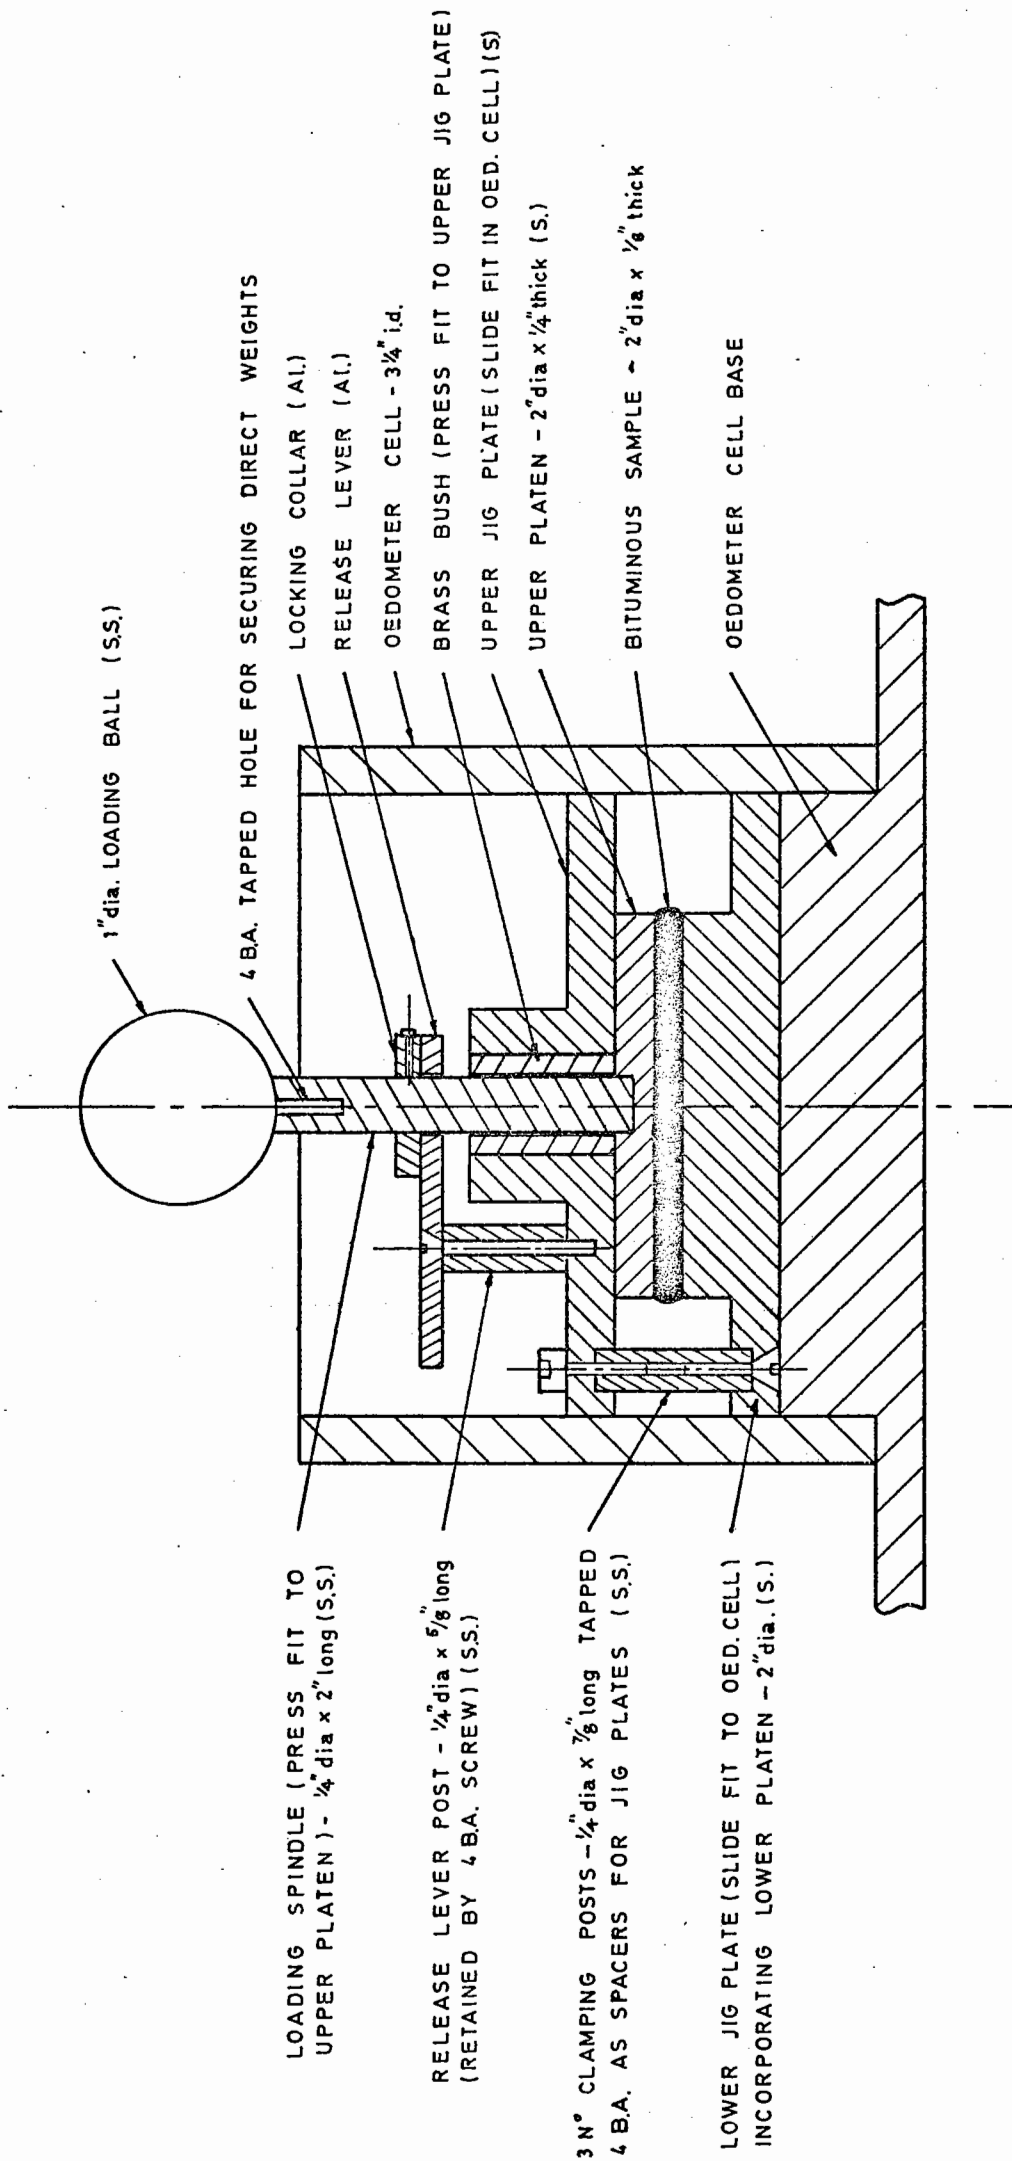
DETAILS OF PARALLEL PLATE VISCOMETER
